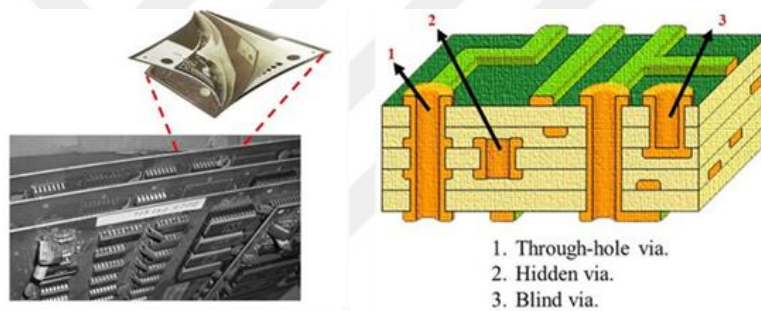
(a) Layers of PCB. (b) Vias of PCB.
